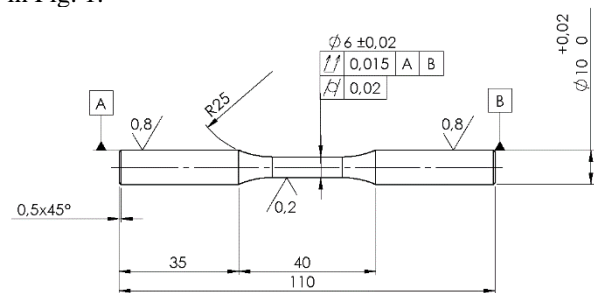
Specimen with 6 mm diameter at gauge in agreement with ISO 1143 standard [1]
